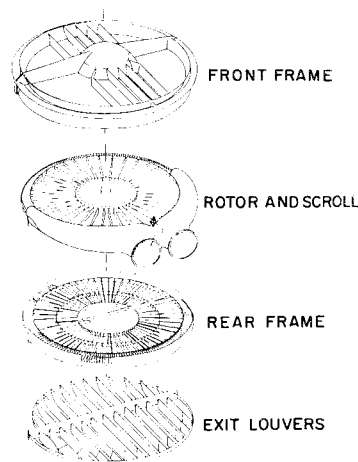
Mechanical parts breakdown: tip turbine cruise fan.
